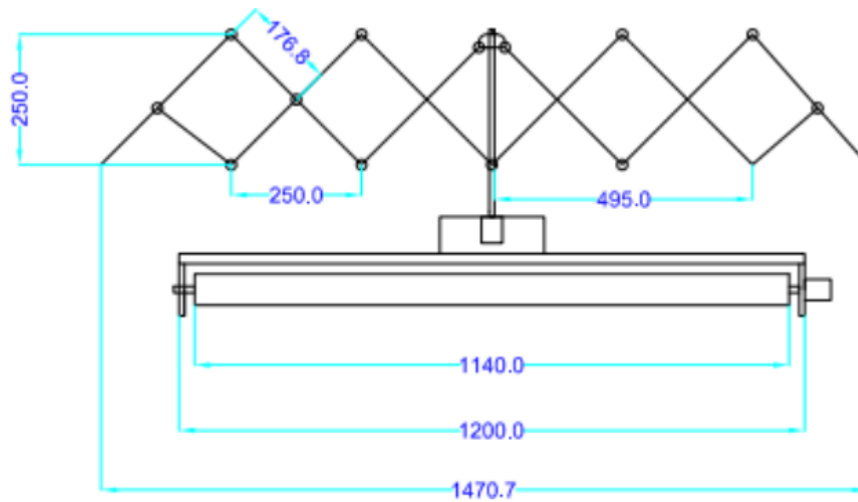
Detailed components dimensions of umbrella mechanism of Automatic Car Cover in front view
